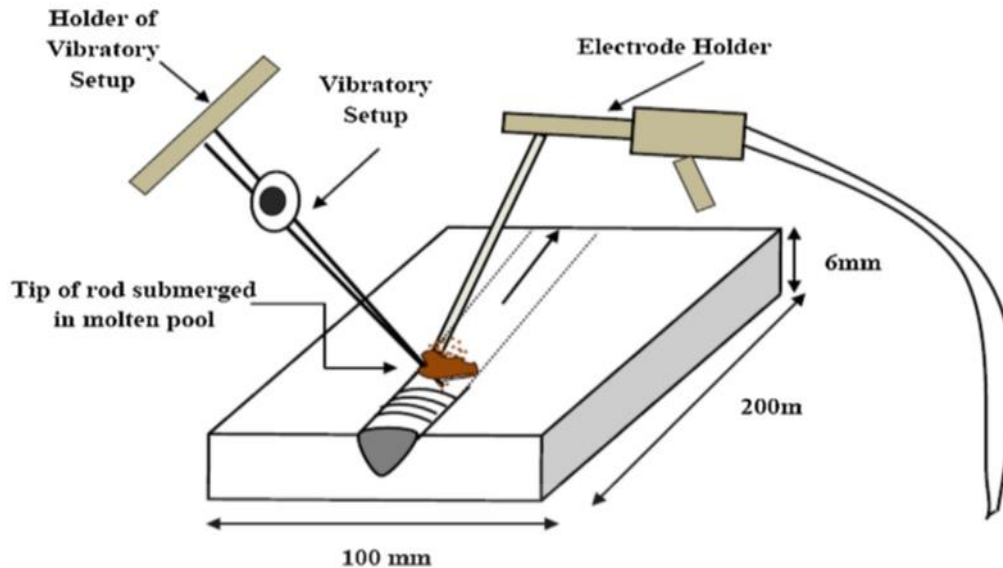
Vibratory welding set up for SMAW of mild steel plates [70]
